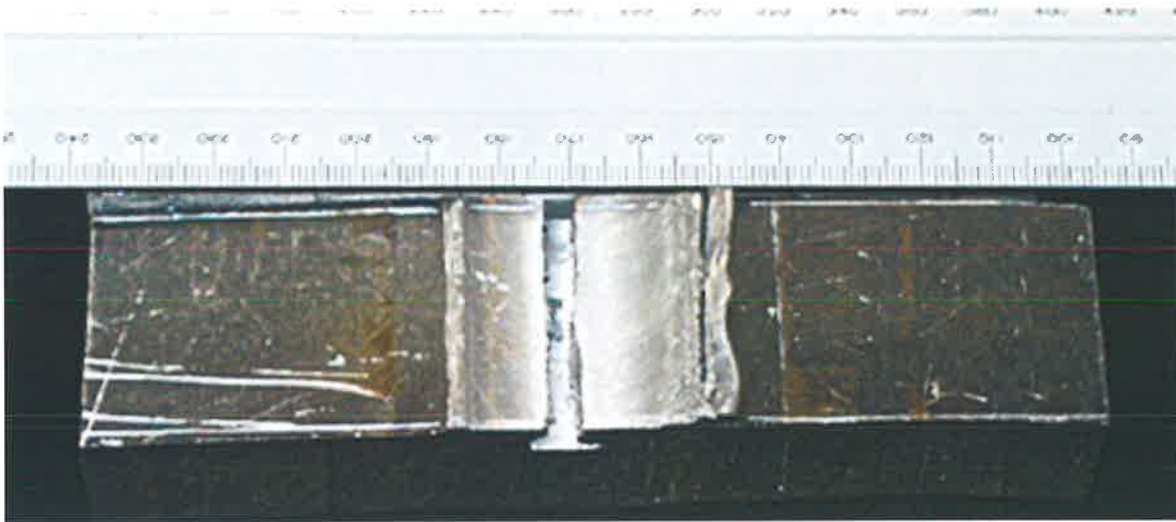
Weld 614D – top view demonstrating a large surface breaking cavity
